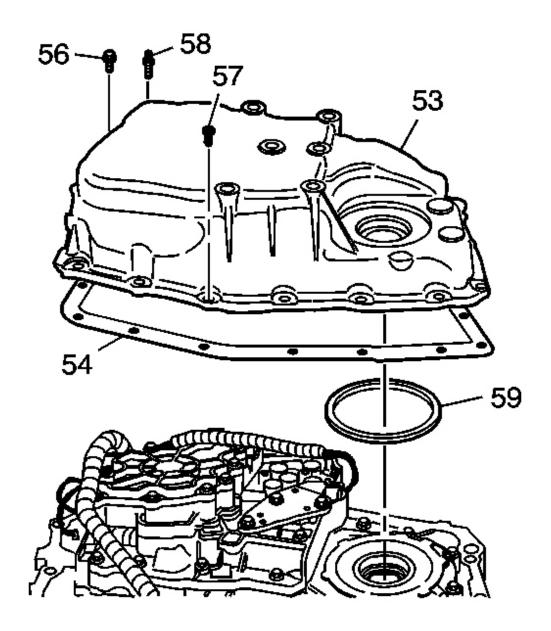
Locating Control Valve Body Cover Gasket Courtesy of GENERAL MOTORS CORP.
